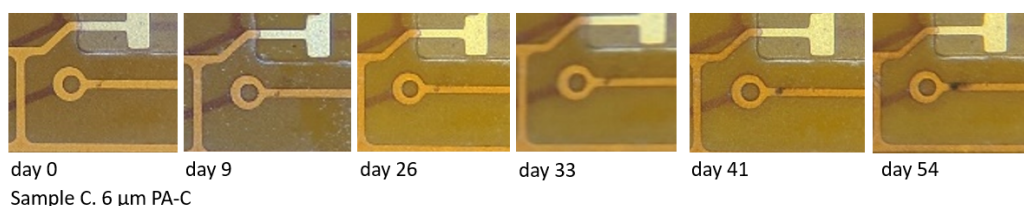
Spot corrosion in polyimide PCB with parylene coating. The discoloration is growing steadily.
